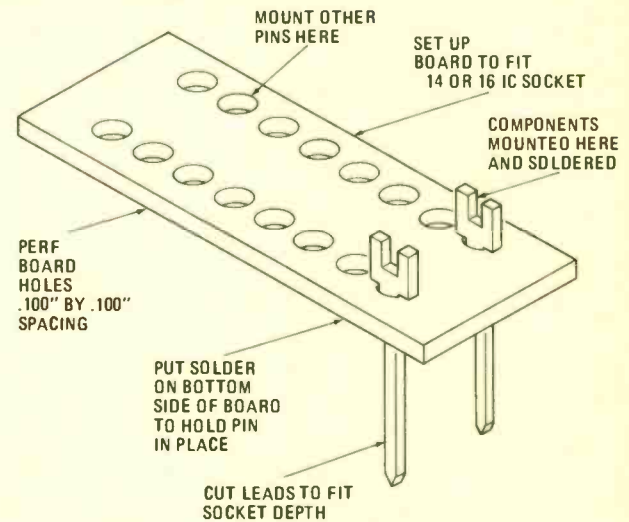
VECTOR T-44 PINS AND PERFORATED BOARD can be used as a plug-in terminal strip for discrete components.
